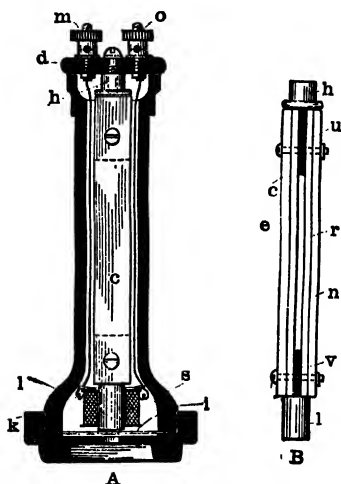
Single-Pole Receiver and Details of the Magnet Used in It
